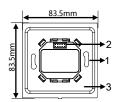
Dimensions - Front View 图 2. 尺寸图 - 正面
